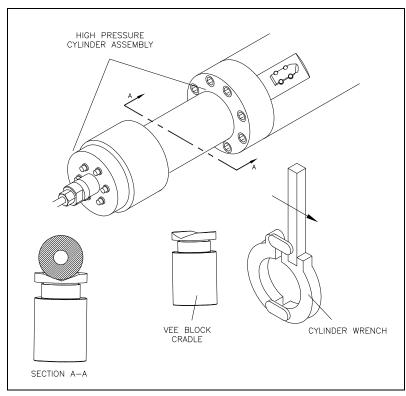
High Pressure Cylinder Assembly Removal and Installation
